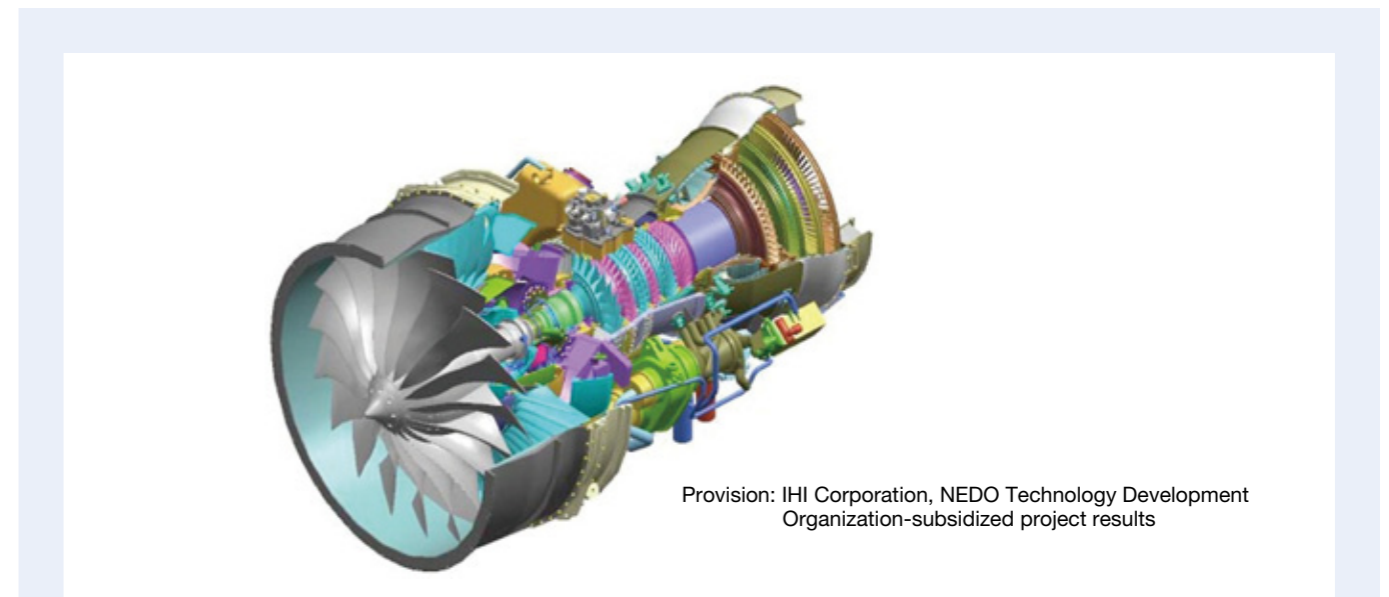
Cutaway view of a small, environmentally-friendly jet engine⁴⁾
